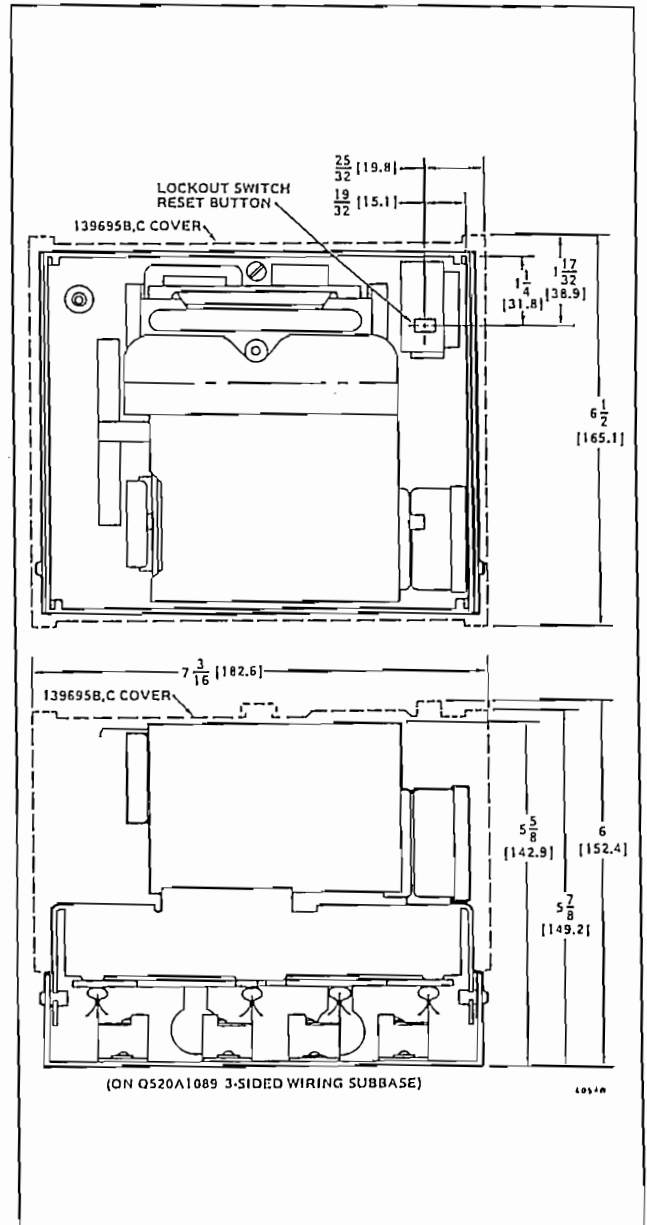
MOUNTING DIMENSIONS OF THE R4140 PROGRAMMER ON THE Q520A WIRING SUBBASE, IN in. [mm SHOWN IN BRACKETS].
